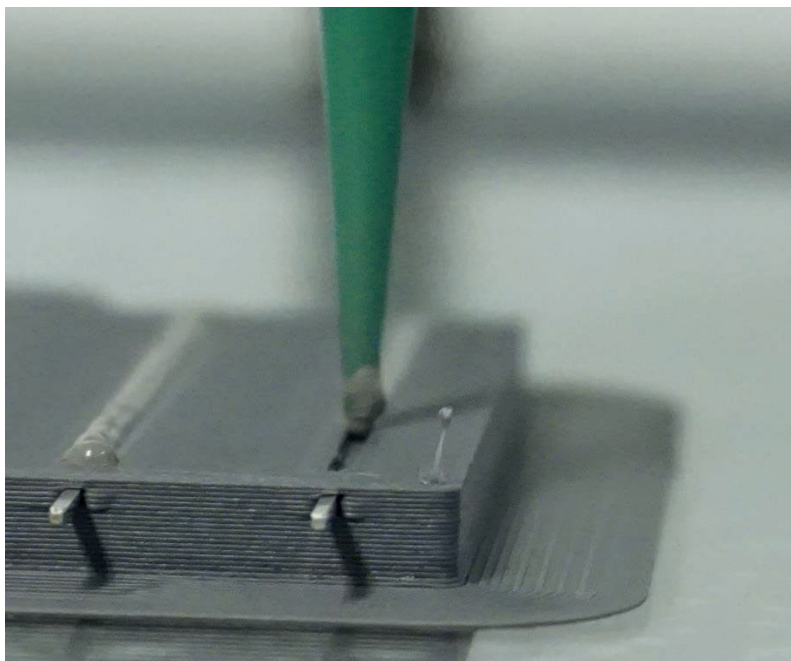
Solder paste being printed in the recessed channel. On the left the over extrusion of solder paste can be seen.
